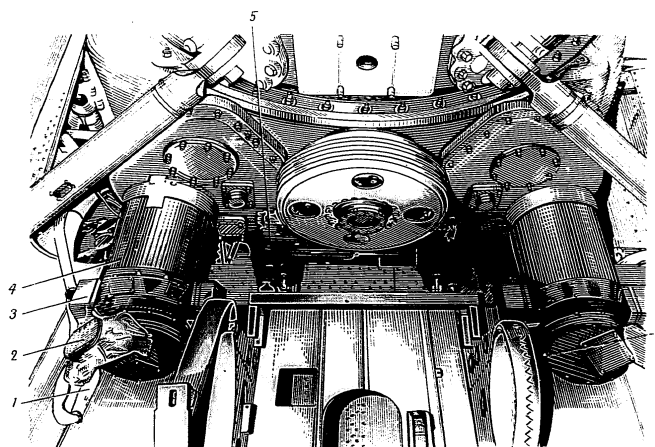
INSTALLATION OF CTC-90/260 GENERATOR
